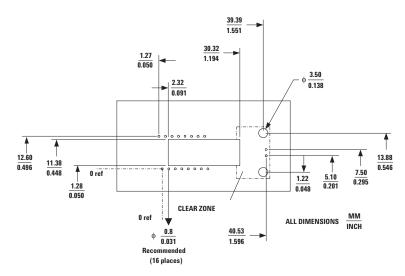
Recommended PCB mechanical cutouts and spacing (top view).
